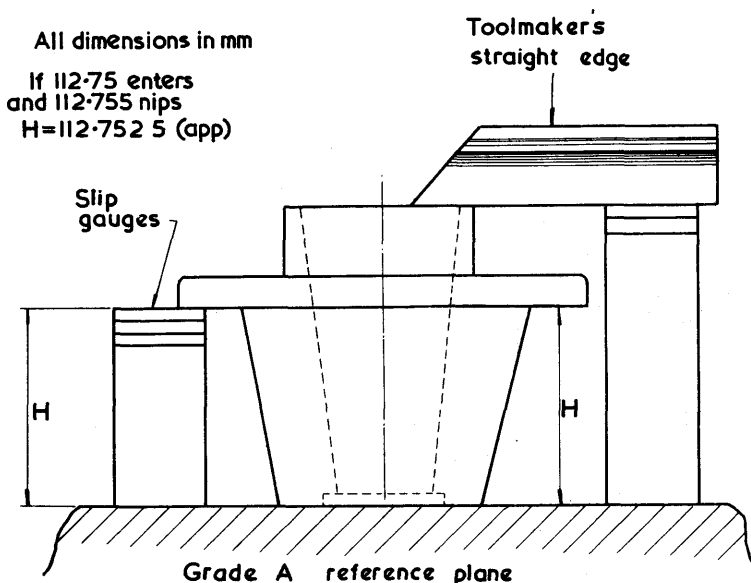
Use of Slip Gauges and Toolmaker's Straight-edge.
